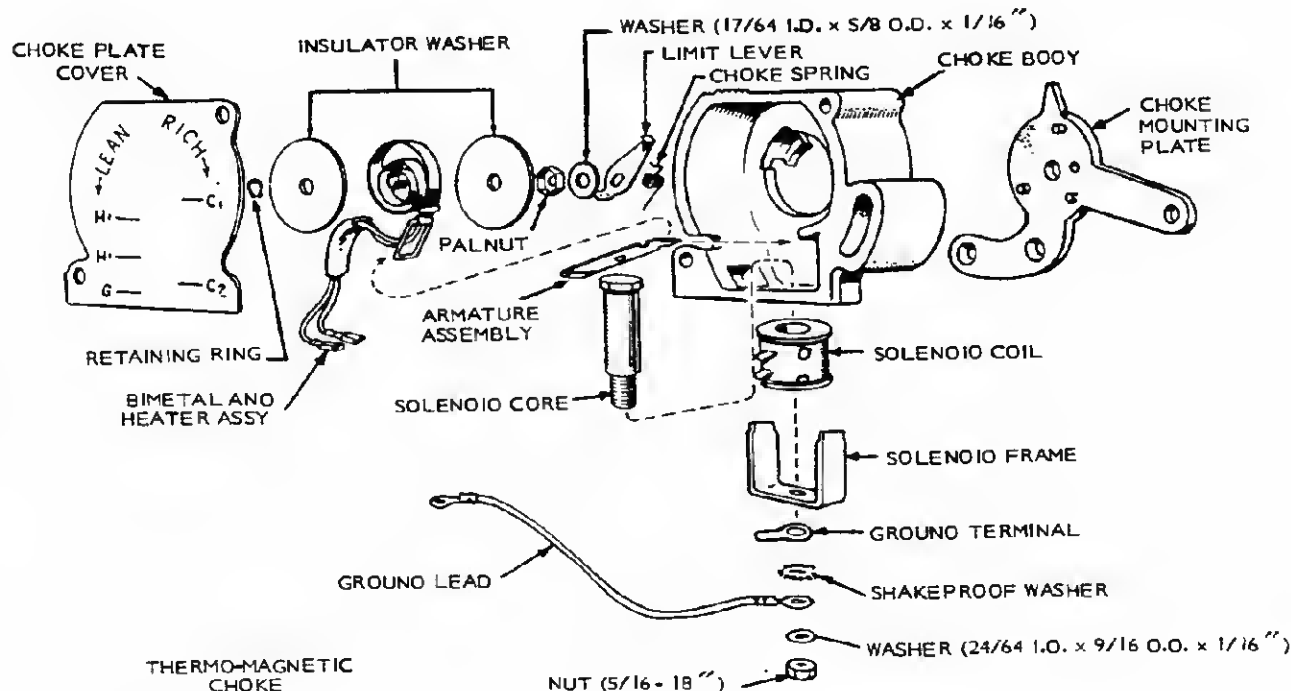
THERMO-MAGNETIC CHOKE ASSEMBLY
